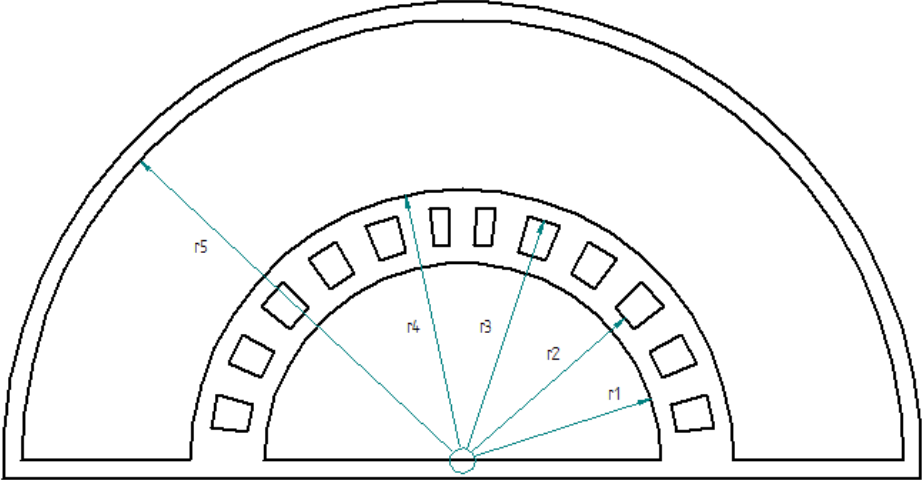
Front View of Initial Coolant Chiller Design with Radii designations
